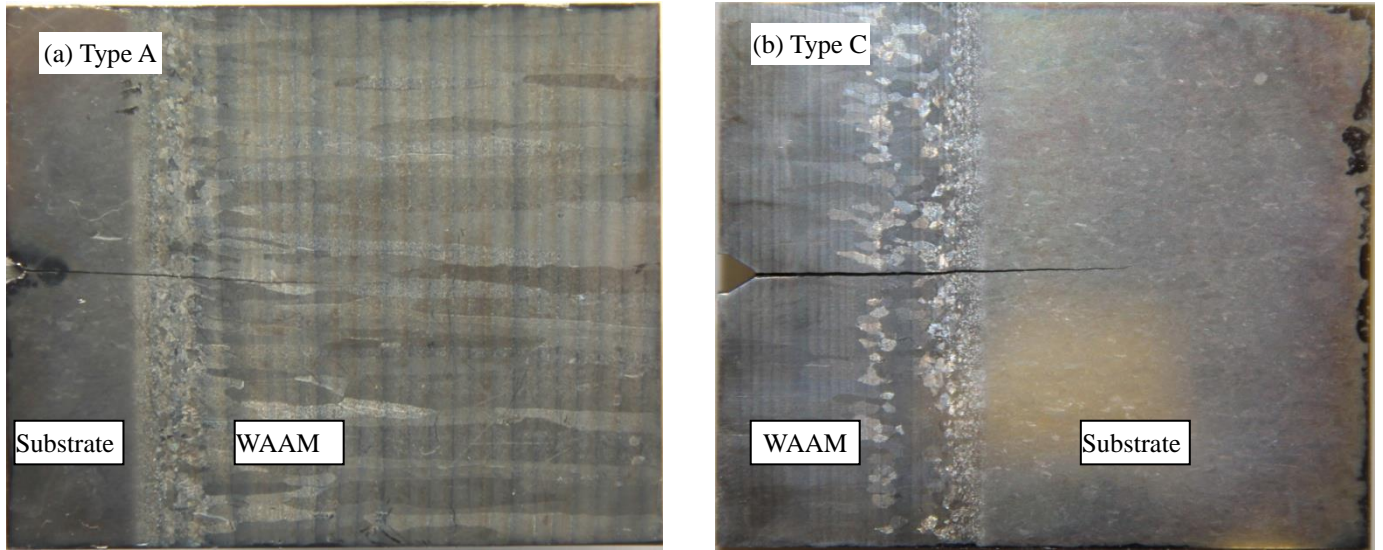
Macroscopic photographs showing fatigue crack propagation trajectory
